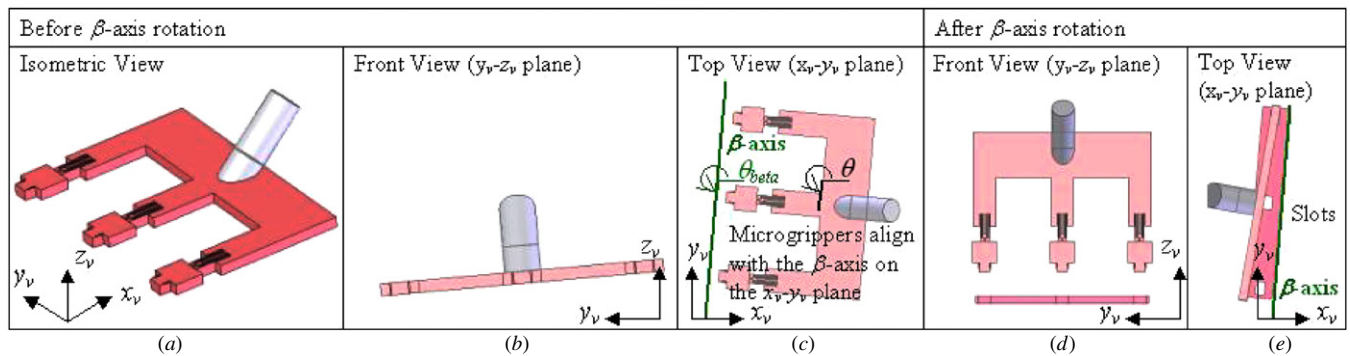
Different camera views with the γ -axis correction: (a) isometric view; (b) front view; (c) top view of the microgrippers; (d) front view; (e) top view of the microgrippers after β -axis 90° rotation.
